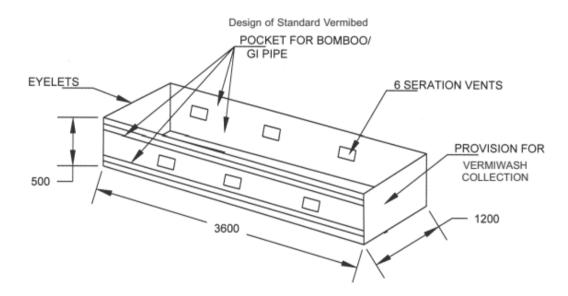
(A) TYPICAL VERMIBED CONSTRUCTION
